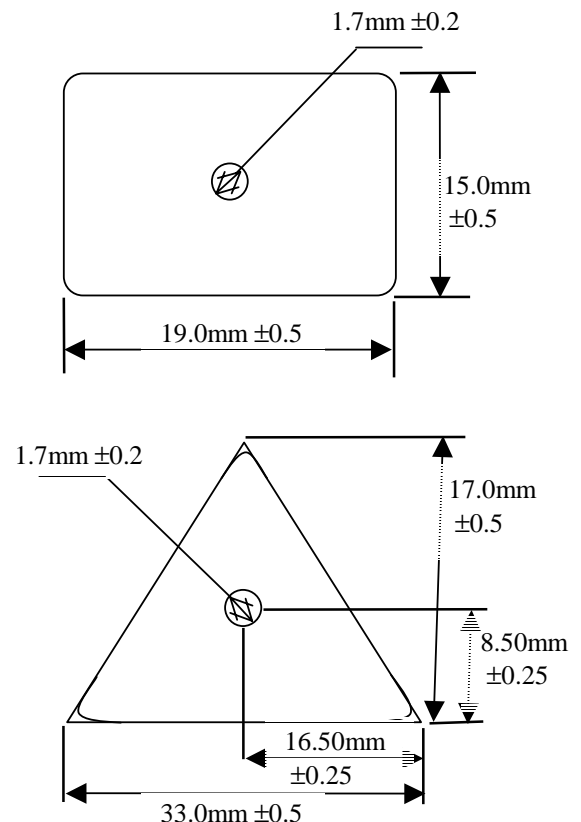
MINERvA rectangular (top) and triangular (bottom) shaped extruded scintillator with co-extruded hole and coating.
